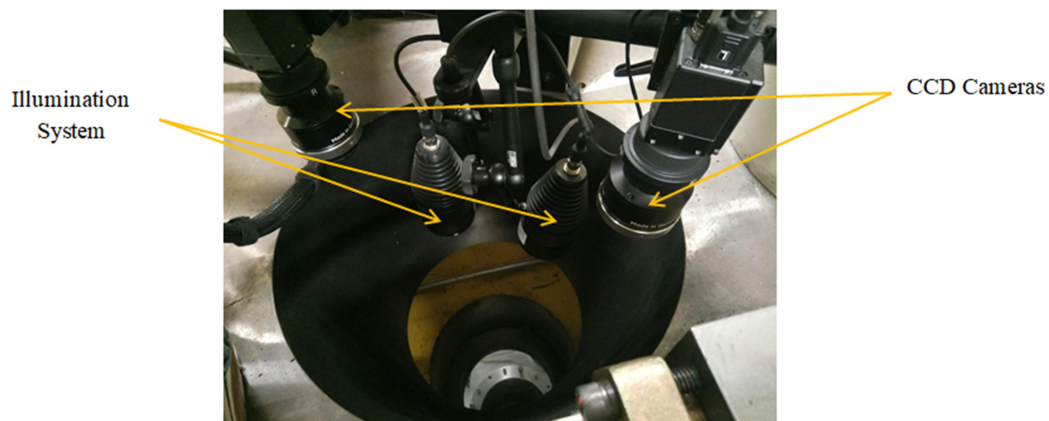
ARAMIS online strain measurement system CCD cameras attached to MACRODYNE 150 Ton hydraulic press and located directly above the deforming dome specimen.
